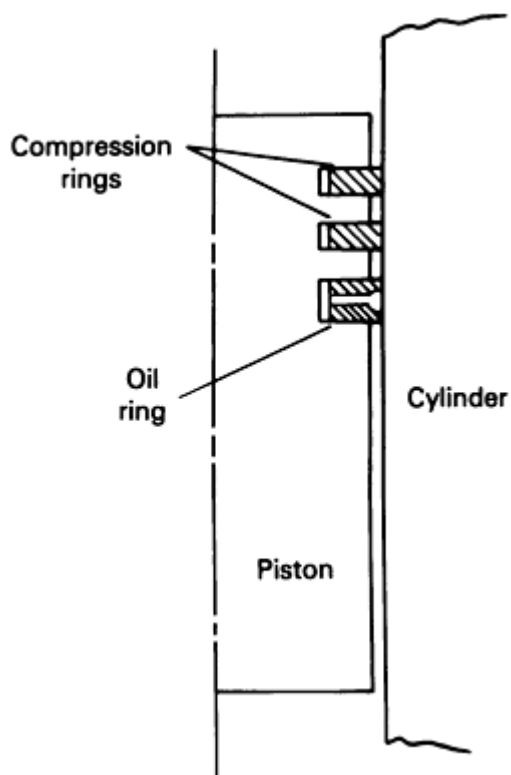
Schematic of piston ring assembly showing location of compression rings and oil ring
